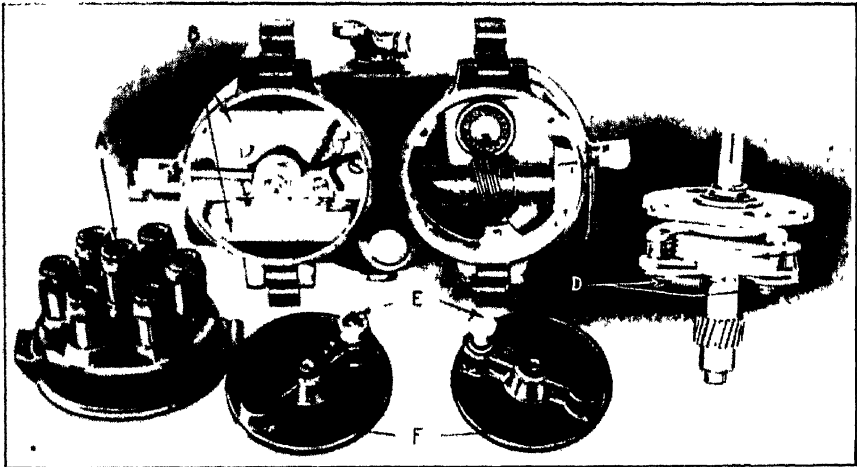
Pierce-Arrow ignition unit showing condenser mounting and driving mechanism.
